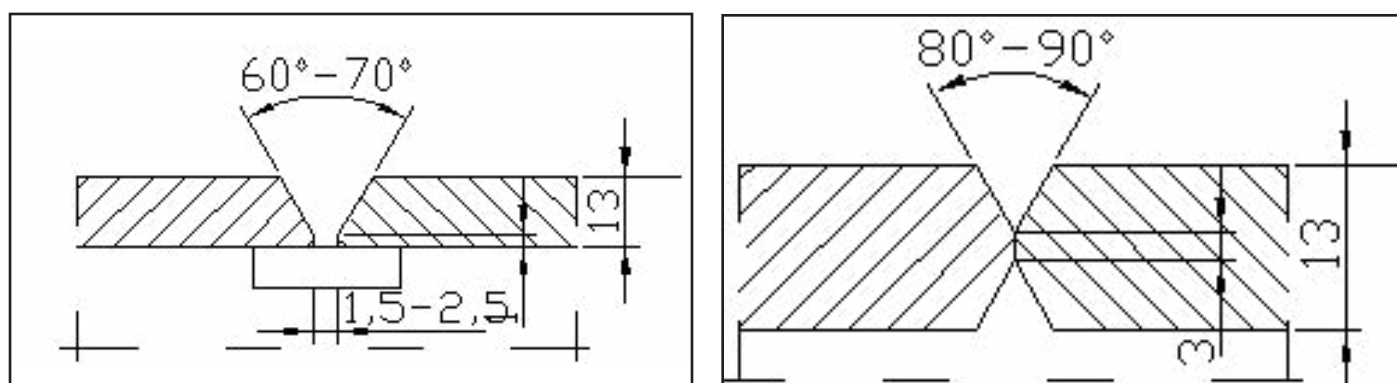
Preparation of plate edges for a) FCAW and b) SAW [15]
